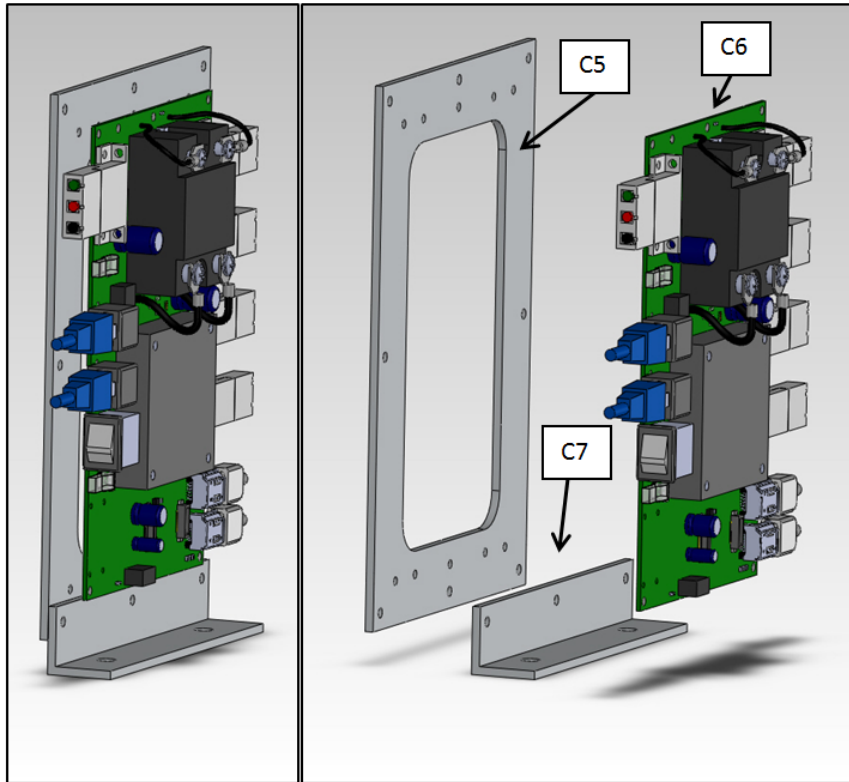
Exploded view of the PWR submodule that handles power distribution and communication. The PCB was held away from the plate using board spacers. The Crydom relay on the board helped to regulate power output.
